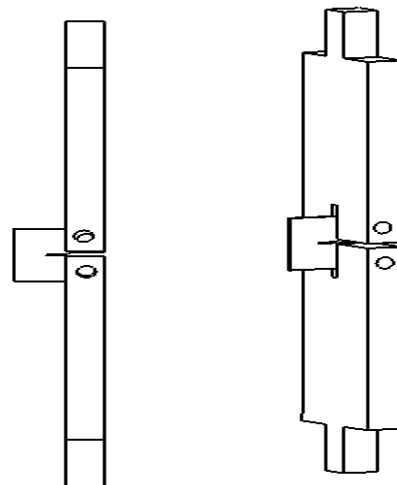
Schematic of how the toughness test specimen is fitted into the mold
